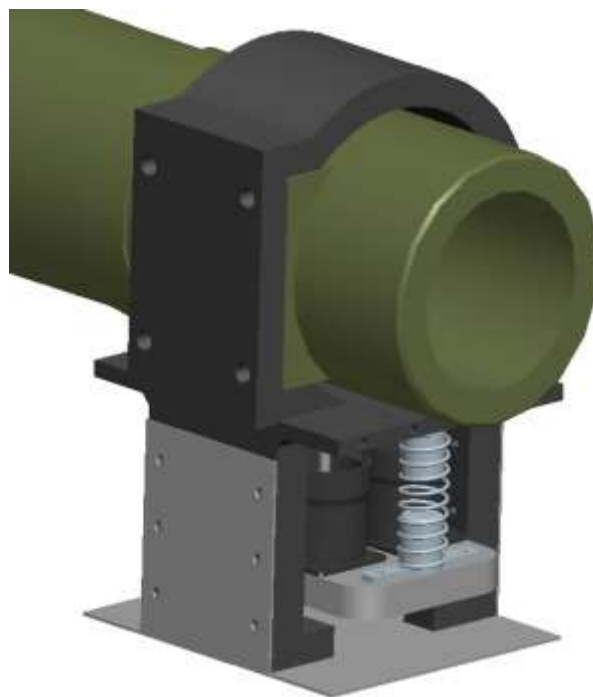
Solid TVA design assembled to the gun Barrel without casing.
